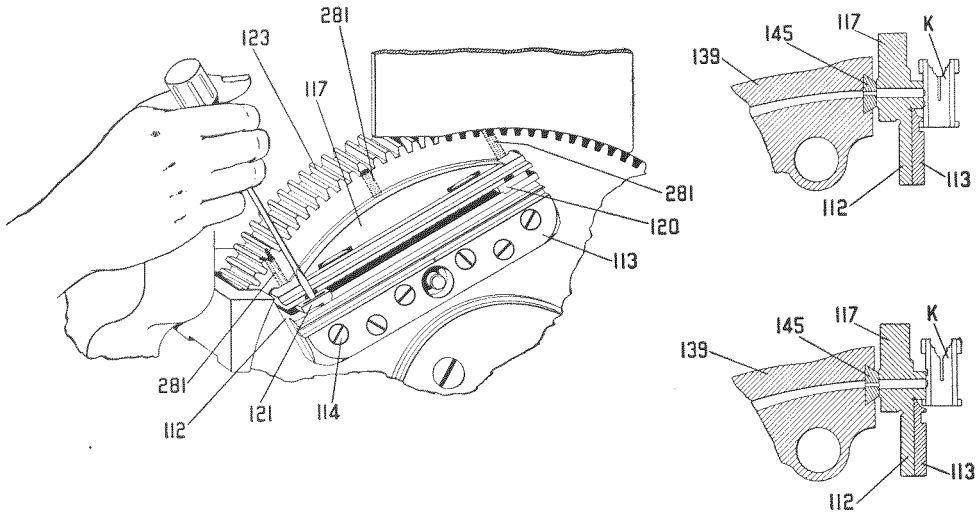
View showing the method of removing and replacing liners in the mold.
